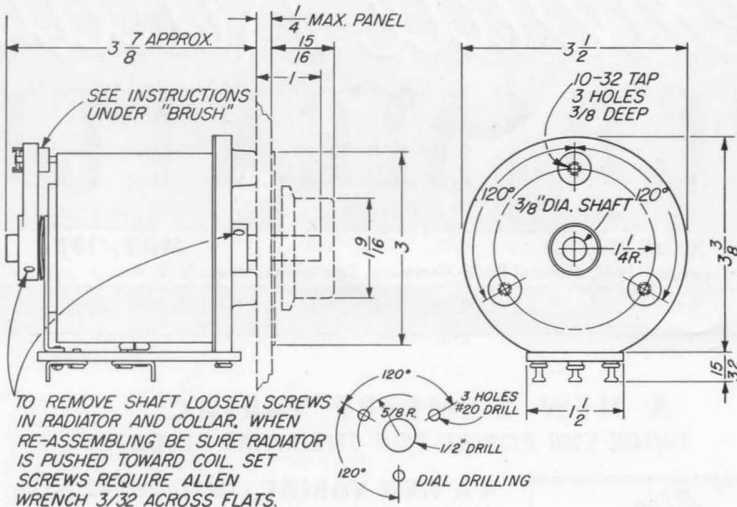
Dimensions of the Type V-2 Variac. Mounting dimensions and radial clearance are the same as for the older Type 200-B. Depth behind panel is slightly greater.
